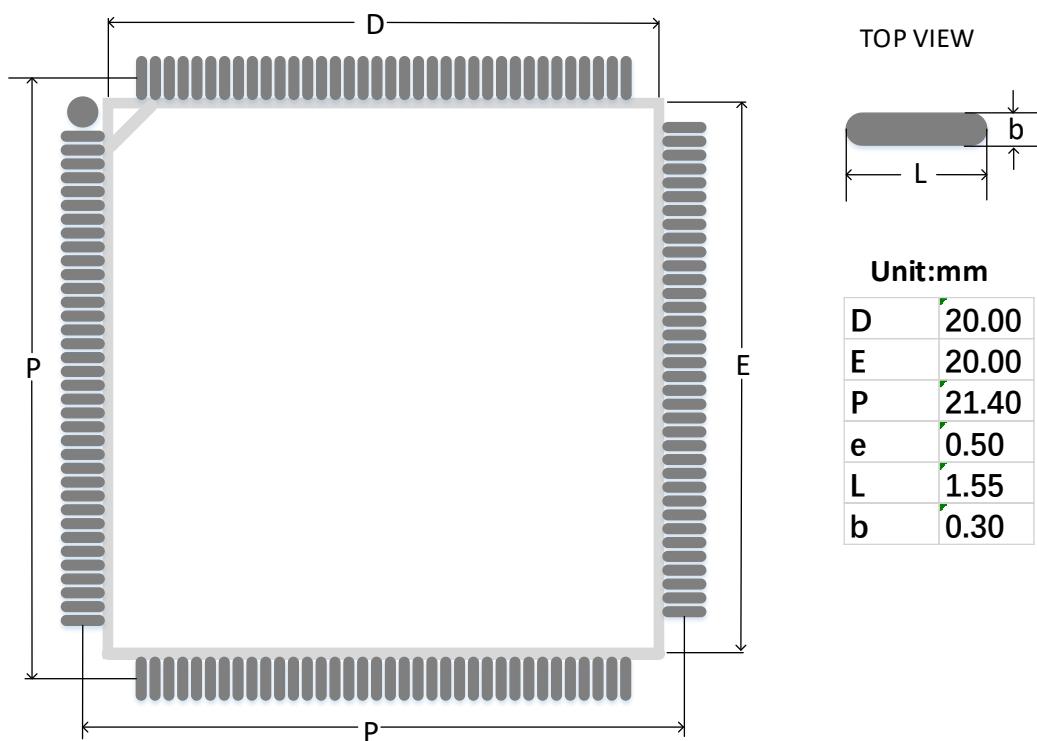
Recommended PCB Layout LQ100/LQ100X
